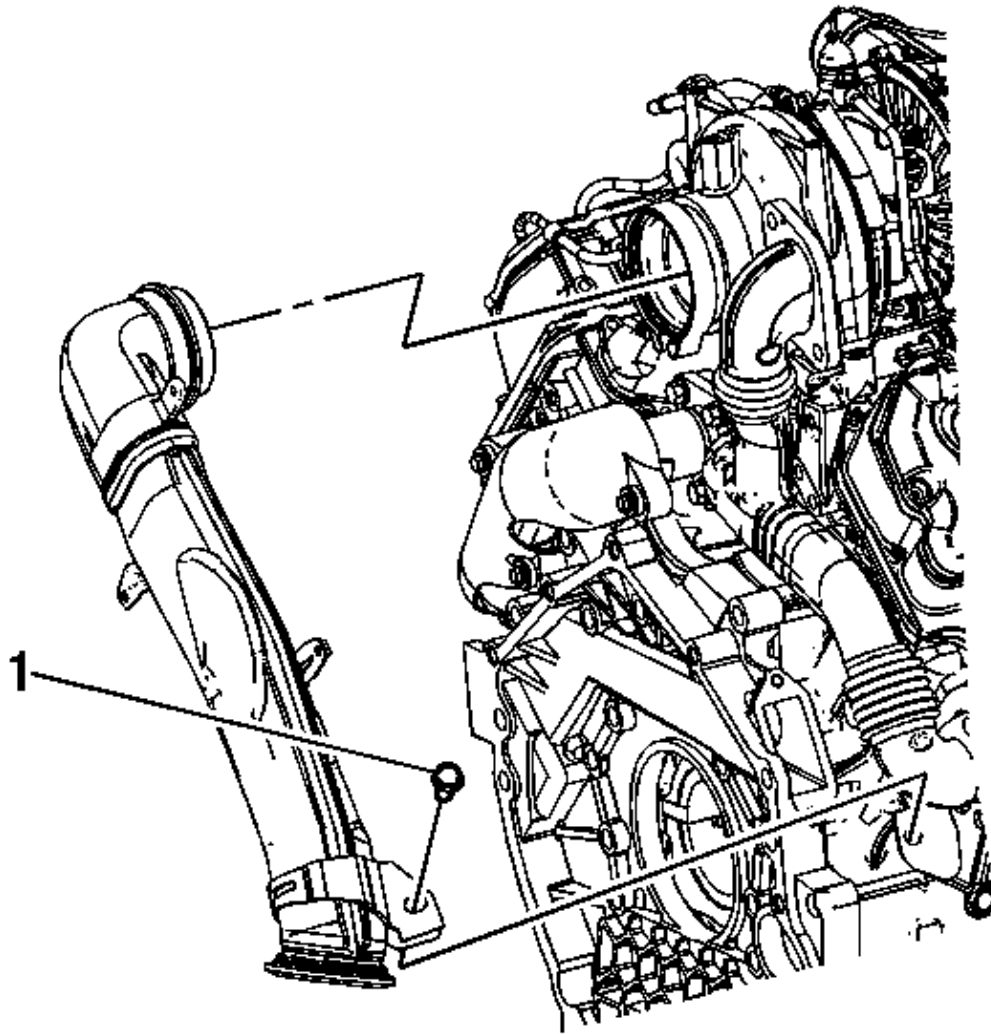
View Of Turbocharger Exhaust Pipe Bracket Bolt
